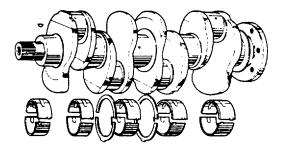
Exploded view of Crankshaft and Main Bearings.
